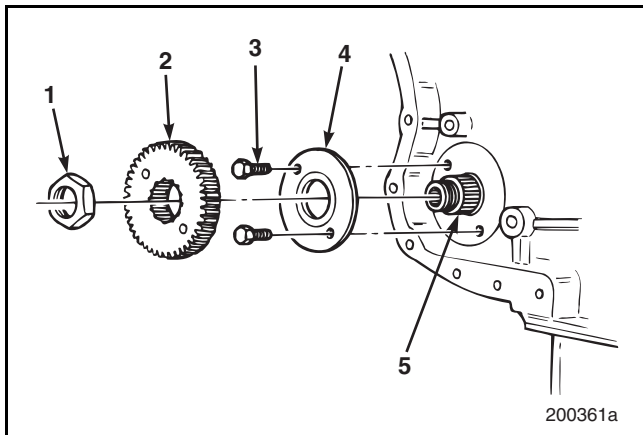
Auxiliary Driveshaft Gear Removal
